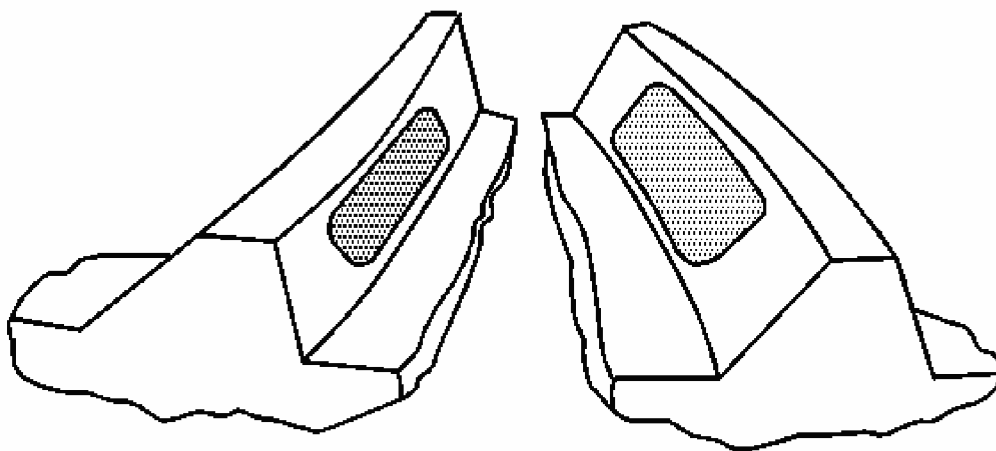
Identifying Correct Gear Tooth Contact Pattern
